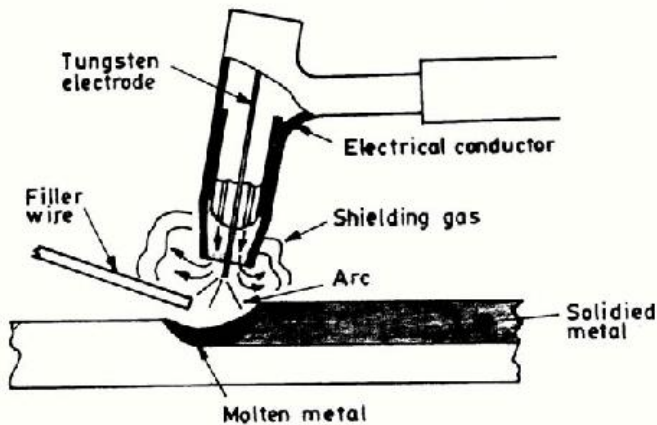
Schematic of a Gas Tungsten Arc Welding Technique.
